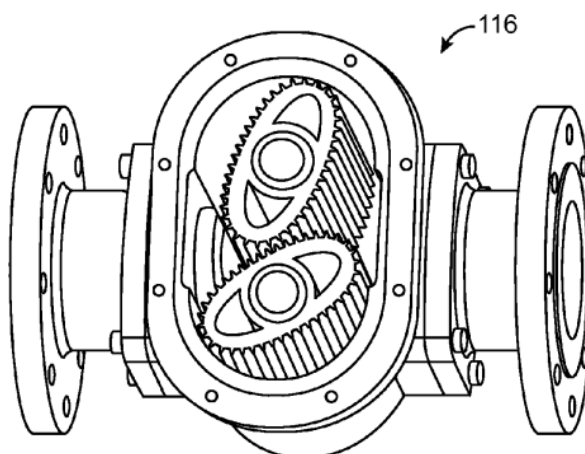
Cut-away view of a toothed oval gear pump [20]
